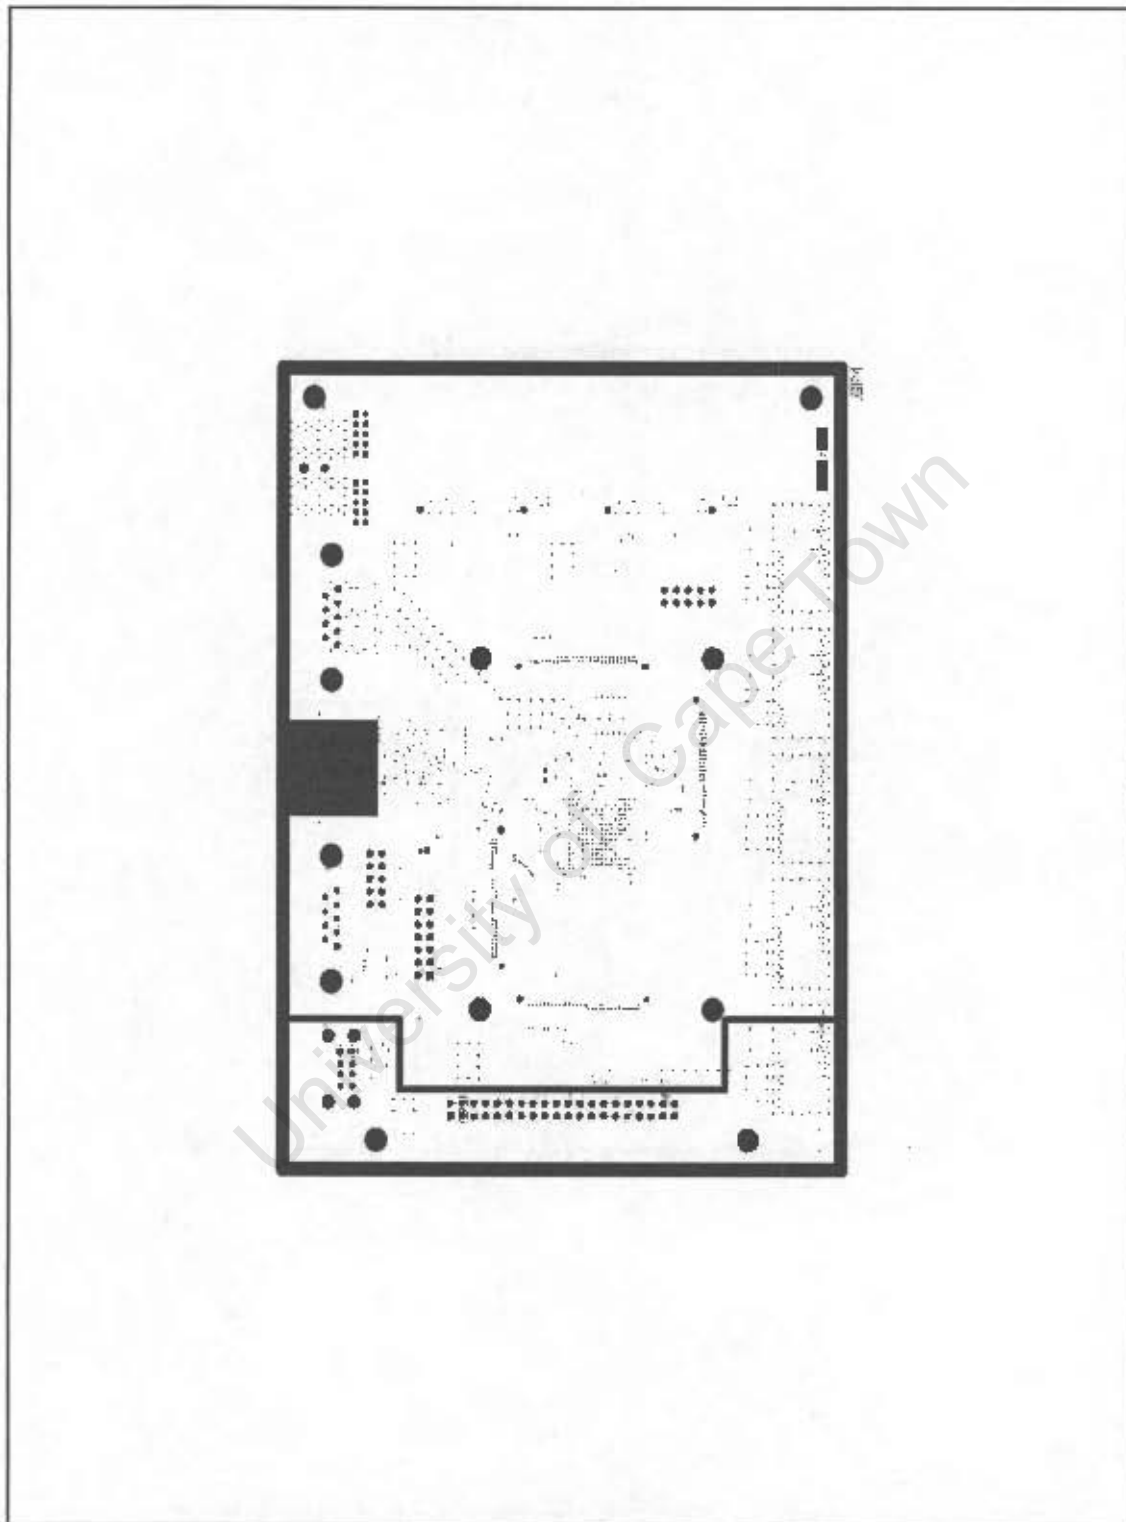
RUI Motherboard PCB Layout - +2.5V/+5V Supply Plane
